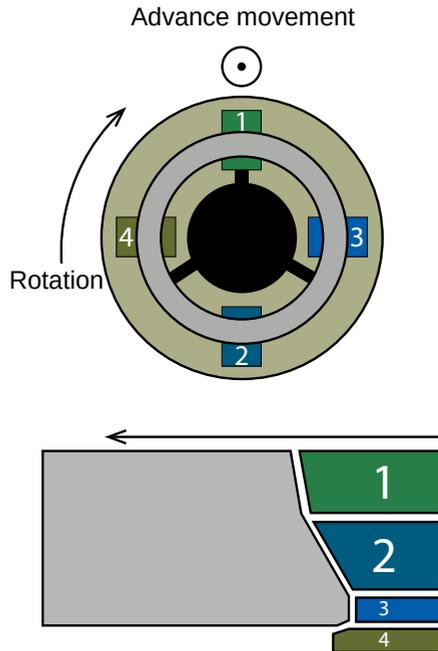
Bevelling example: weld preparation at the end of a tube segment which had been cut previously to the proper length
